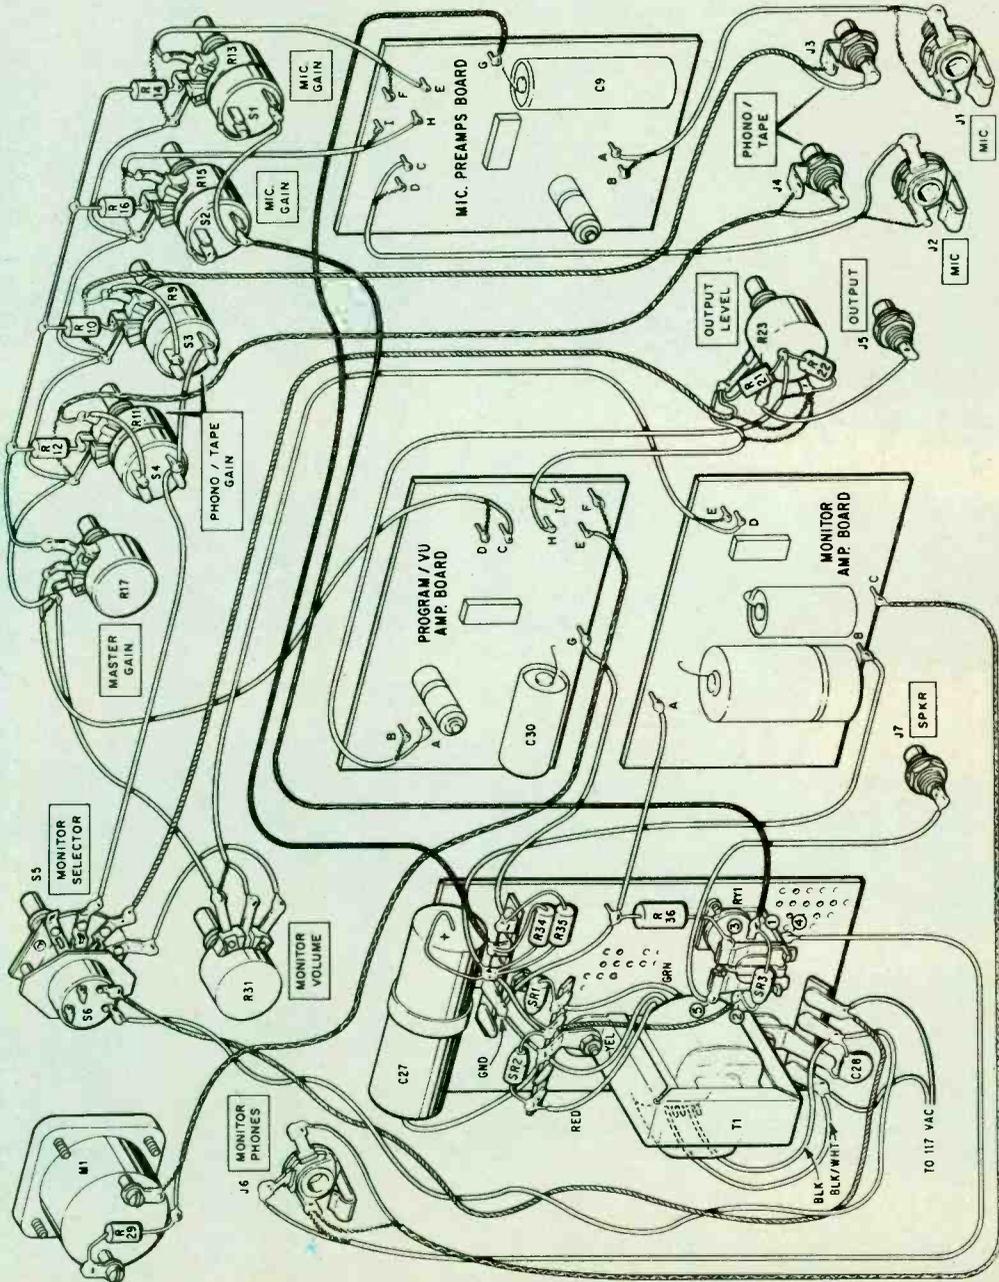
Pictorial shows connections of cabinet parts to boards. Photo in Fig. 4 shows location of parts.
